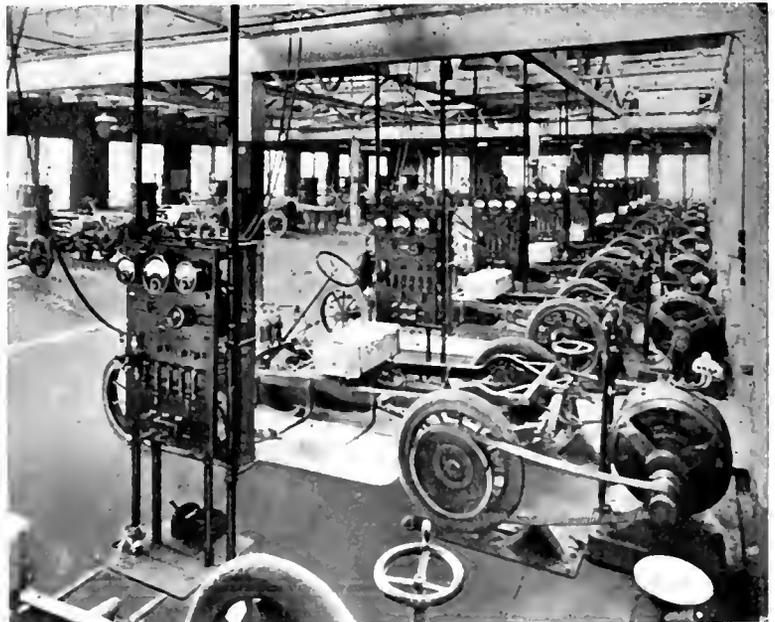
Chassis-Testing Dynamometers in the Plant of the Cadillac Motor Car Company, Detroit
